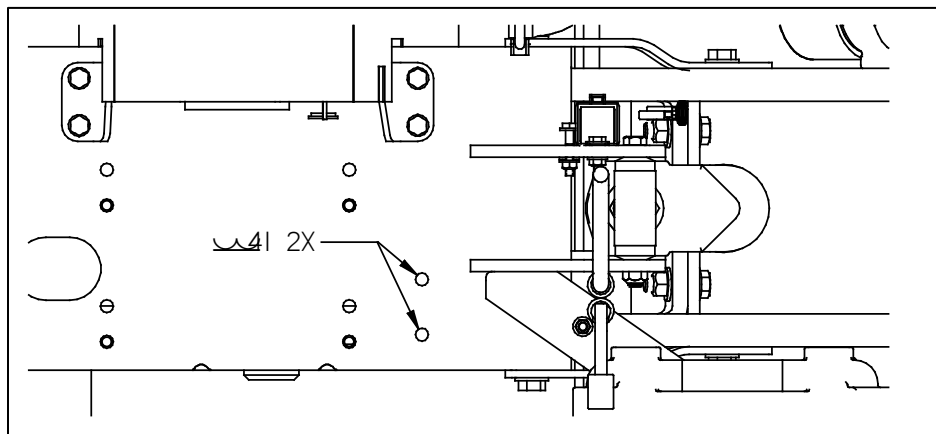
Honda Engine Cyclone Mounting Plate Holes
